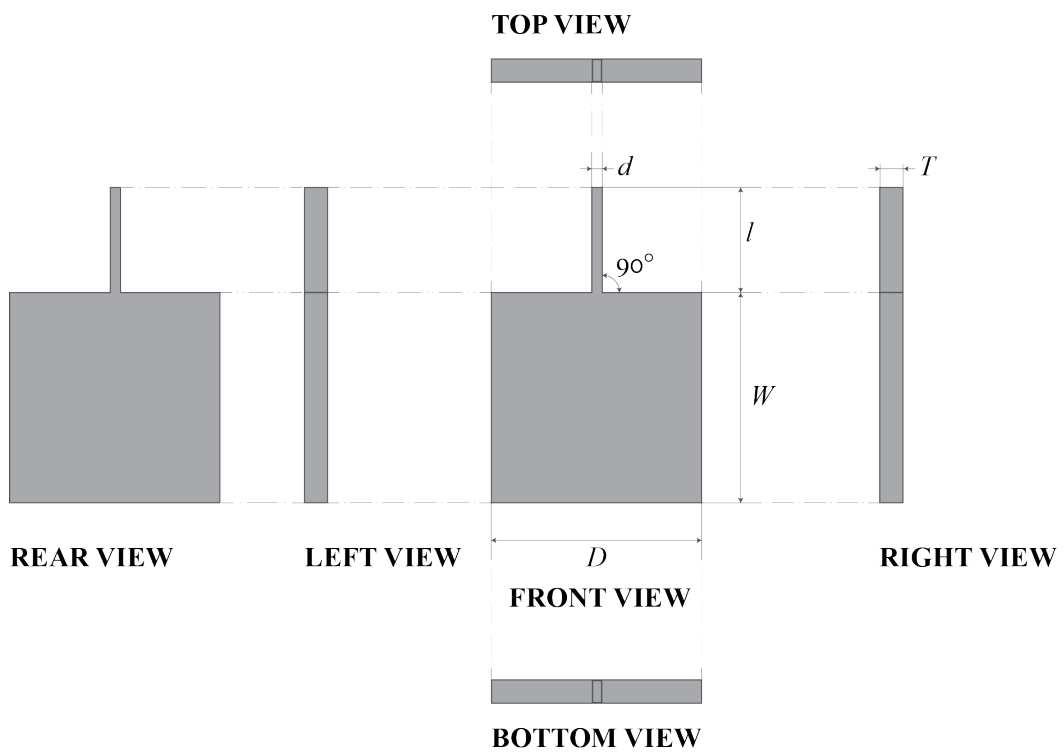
Technical drawing of the un-filletted infinite node specimen, employing the American projection convention
